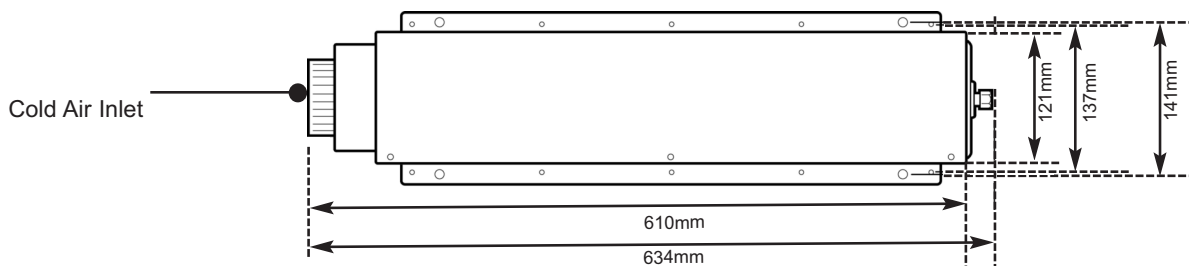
Internal Installation - Plan View - SH2201 / SC2201
